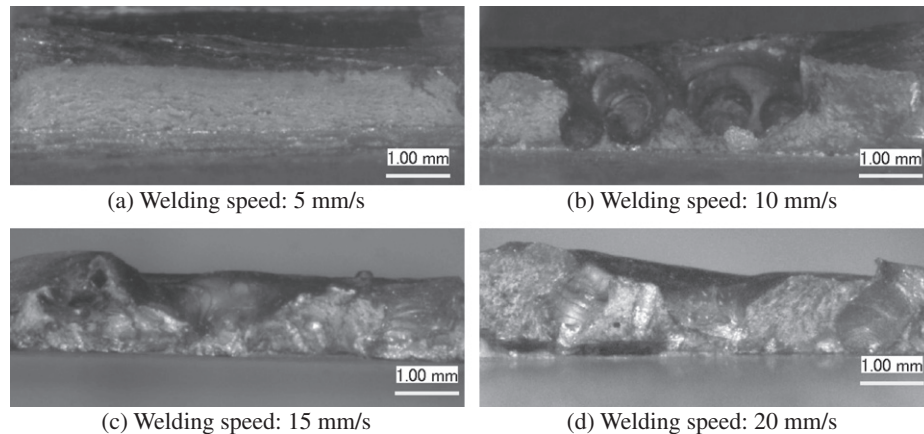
Micrographs of fracture section of weld of lap-jointed galvanized DP980 coupons under different welding speed (laser power is set at 2.0 kW).
